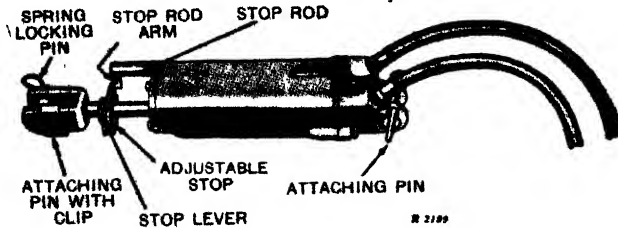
Remote-control hydraulic cylinder with parts named. (Deere & Co.)
